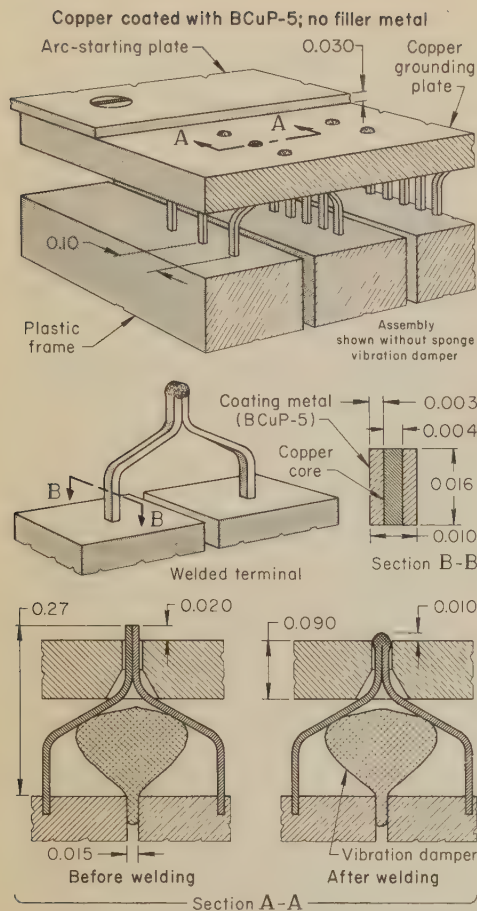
Setup for welding terminal joints for a computer memory-grid array by plasma-arc welding, and appearance of welded terminal (Example 144)
